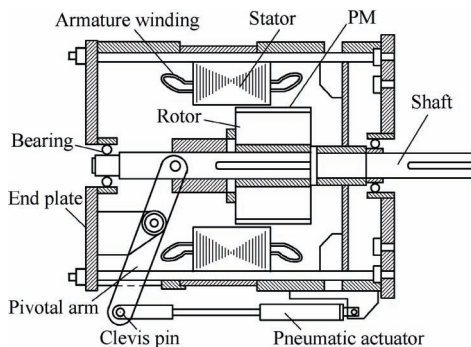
Cross-sectional view of SPM machine equipped with displaceable rotor part^[46]
